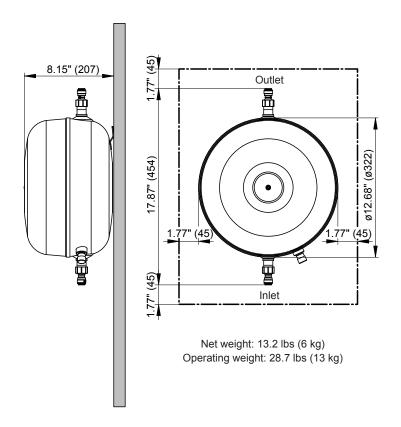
Dimensions expansion tank (dimensions in inch (mm))
